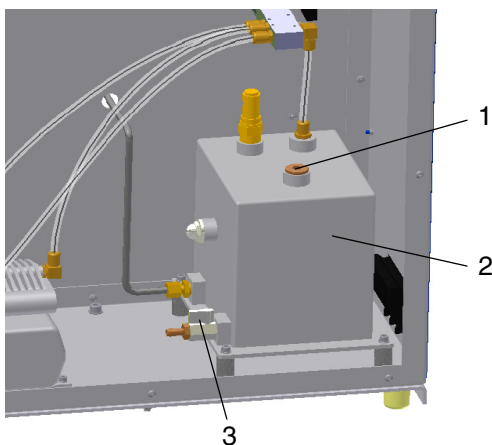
Back view of WL 102 with dismantled rear panel
